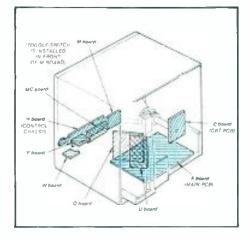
PCB location guide. Control switch mounts in front of the M board. Relays and components mount on the C board.
